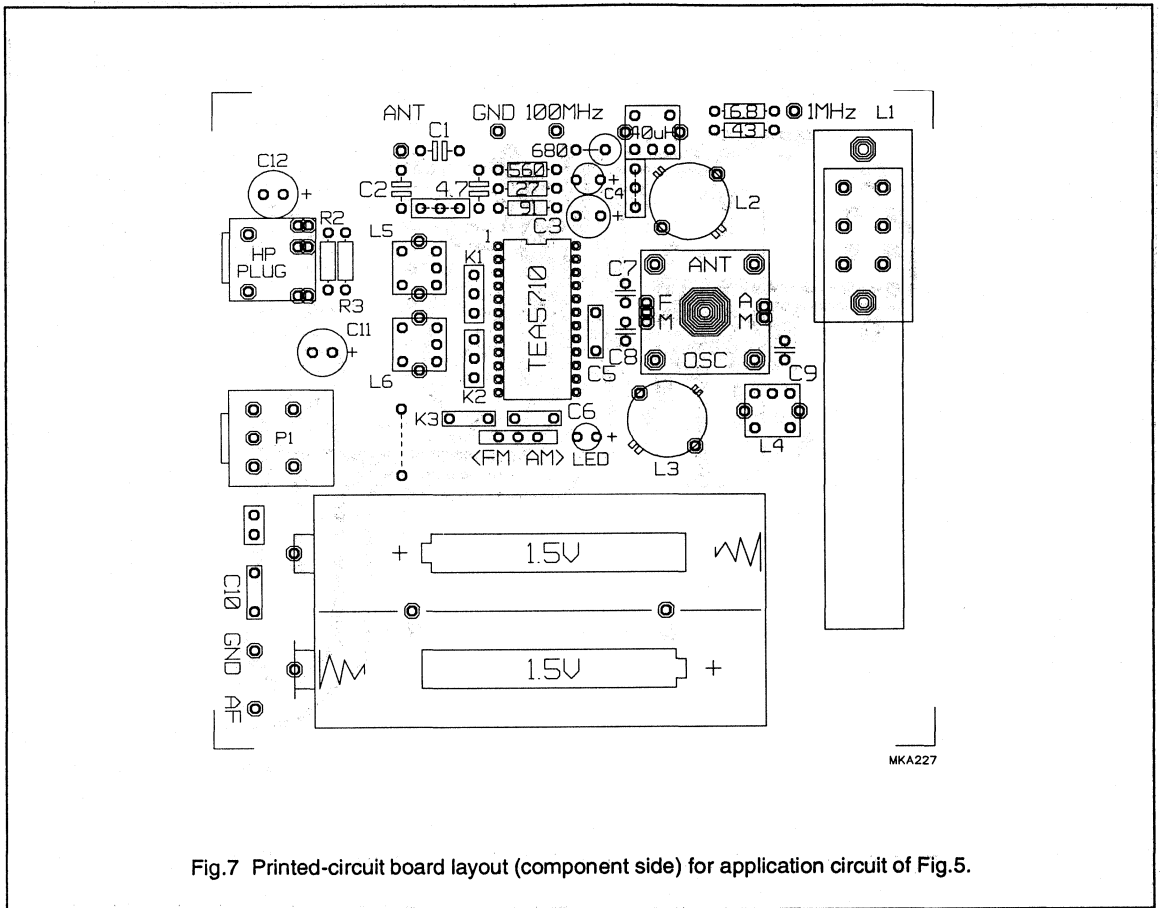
Printed-circuit board layout (component side) for application circuit of Fig.5.
